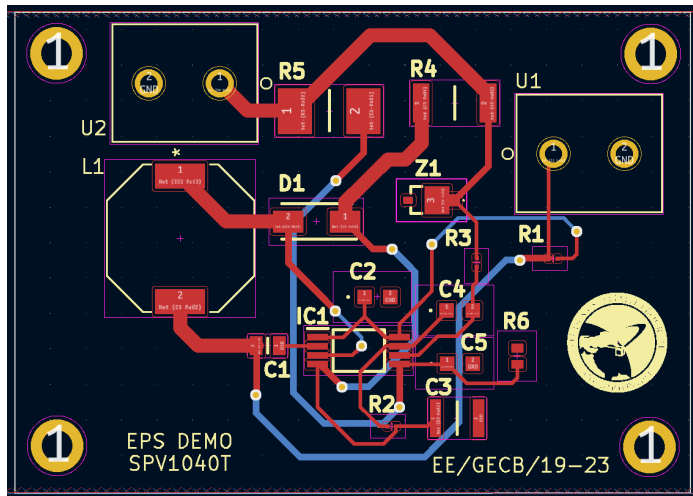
PCB Layout of MPPT (48mm x 34mm)
